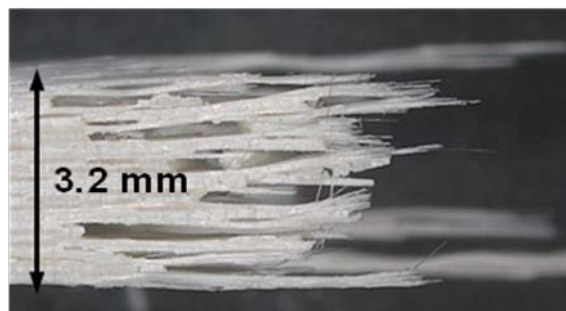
Fracture surface of the N720/AM specimen tested in tension to failure at 1000°C in laboratory air (side view).
